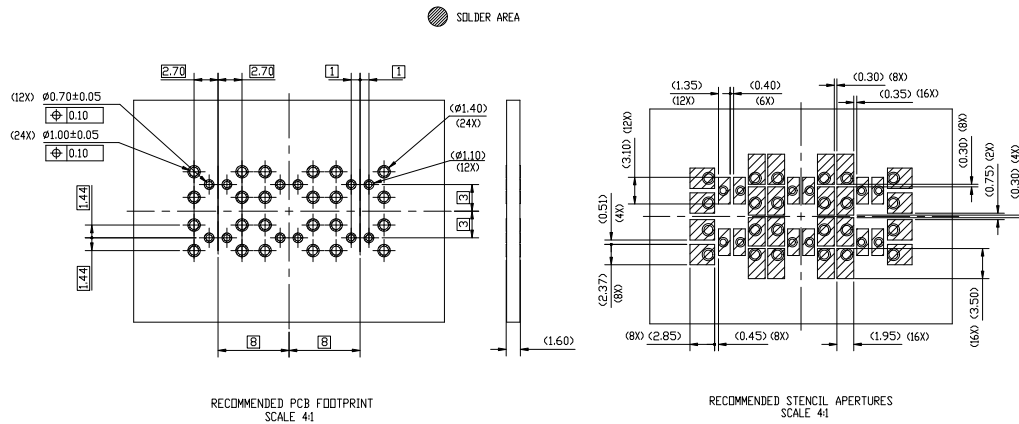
/ Pin Header 6P 180° unsealed, TE-No. 2390045
